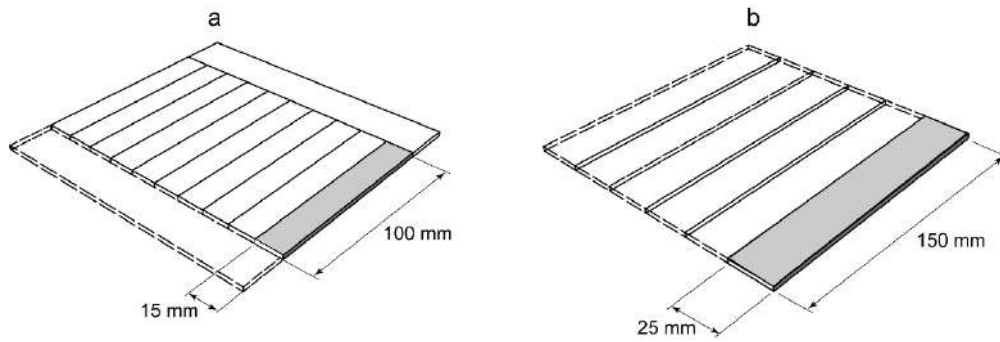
Specimen sectioning for: a) flexural testing; b) tensile testing.
